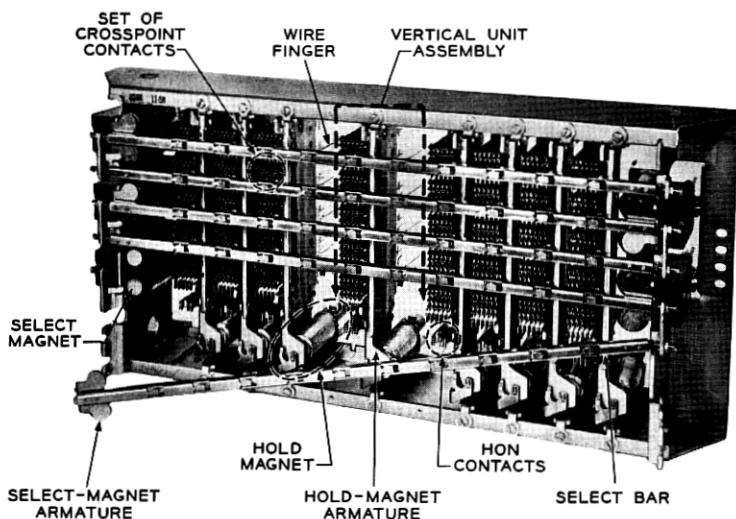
Crossbar switch, showing location of hold magnet as motor element of vertical unit assembly.
